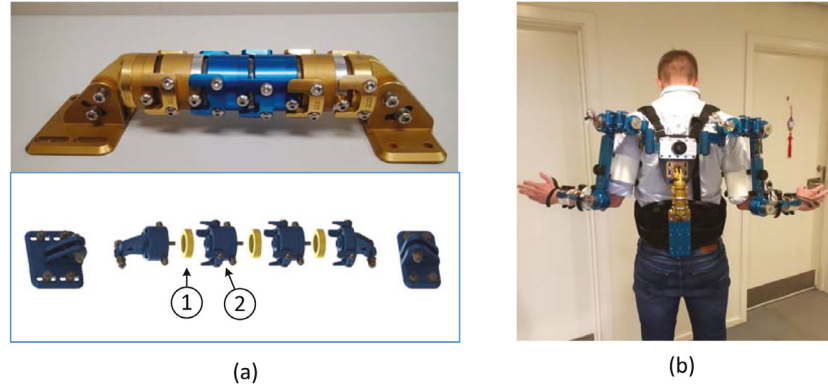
Spine module, (a) an assembly and an exploded view showing (1) intervertebral disk and (2) vertebral body, (b) module mounted in UB-AXO.
